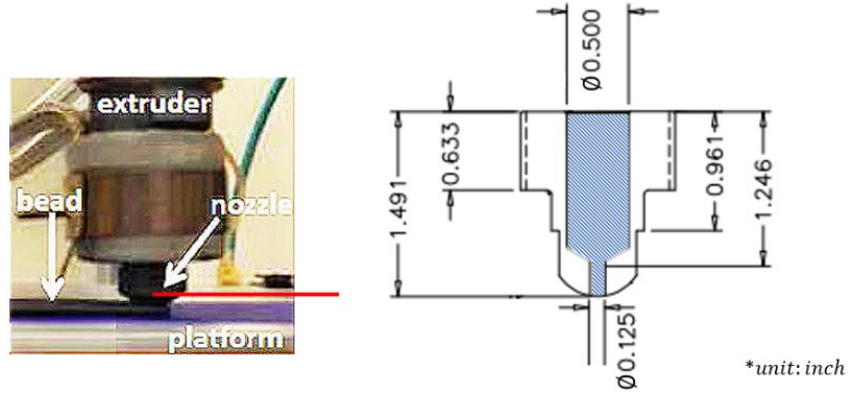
Geometric Dimensions of a Strangpresse Model-19 Extruder Nozzle.
